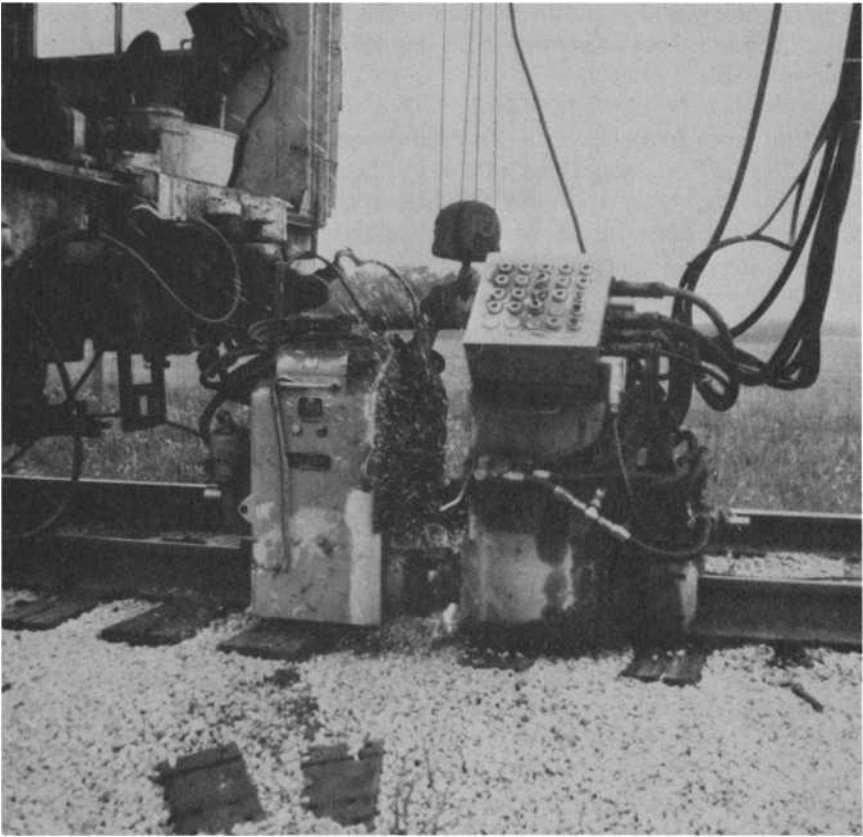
In-track flash welder during welding cycle.
